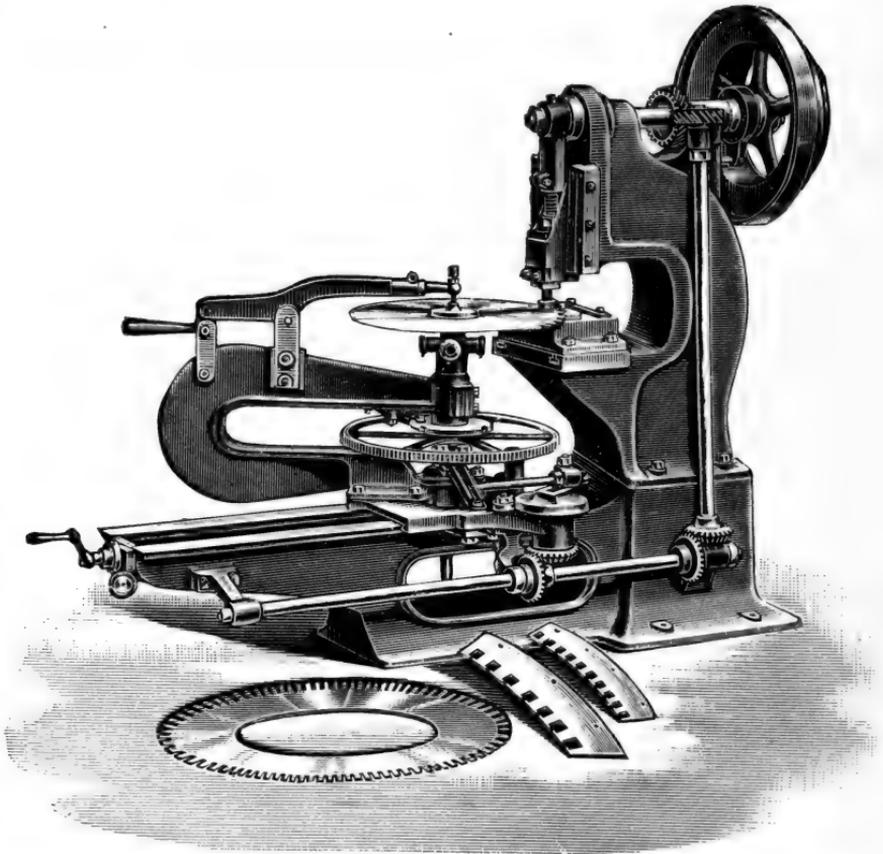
The Stoll Automatic Armature Disc-notching Machine.
